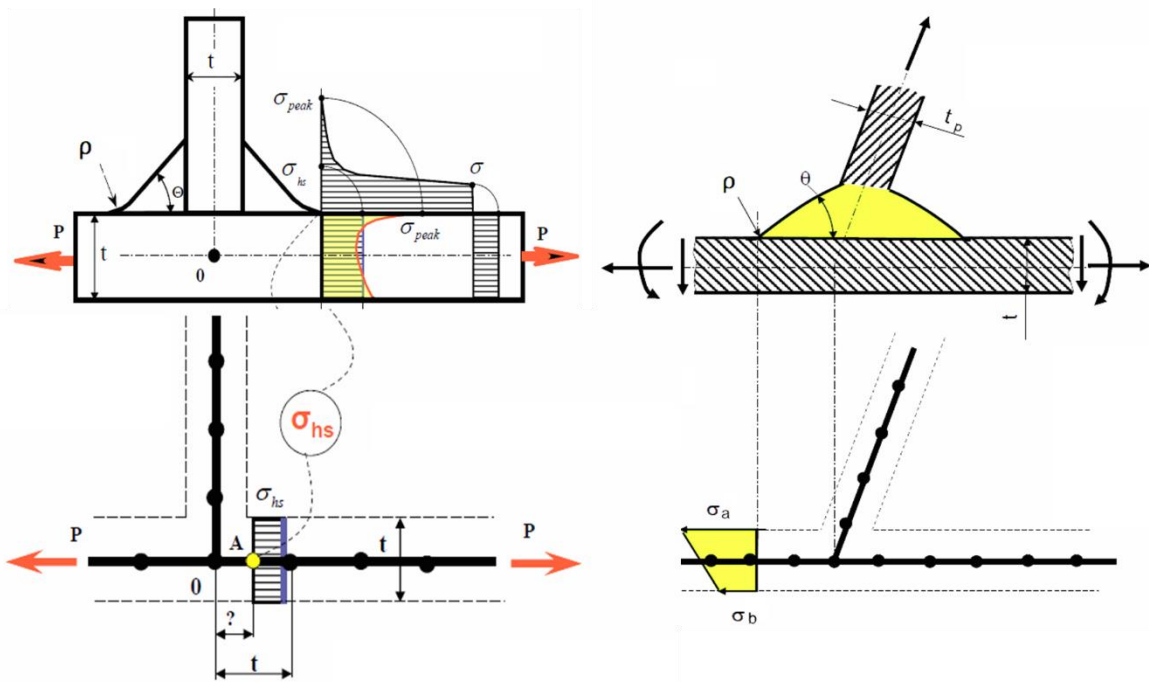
a) Simple T-joint weldment subjected to pure tensile loading P ; b) Shell FE model of a T-joint; c) Inclined T-joint with complex loading modes; d) Shell FE modelling of the weld stiffness
